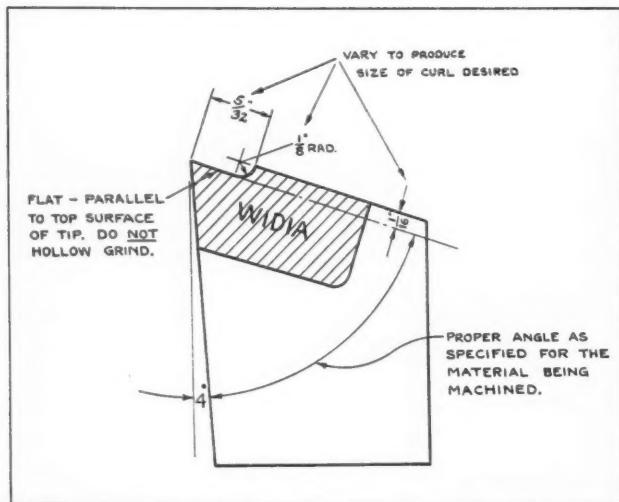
Diagram Illustrating the Preferred Method of Grinding a "Chip Breaker" on Widia Cutting Tool Inserts
